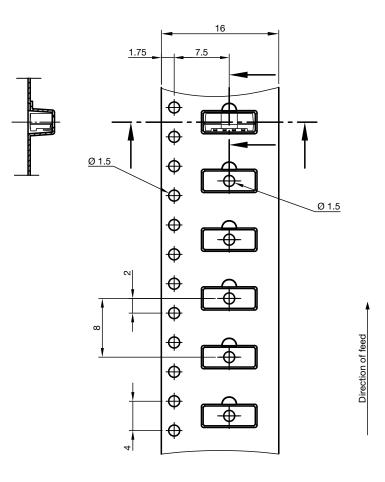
Issue: 2; 06.10.15
